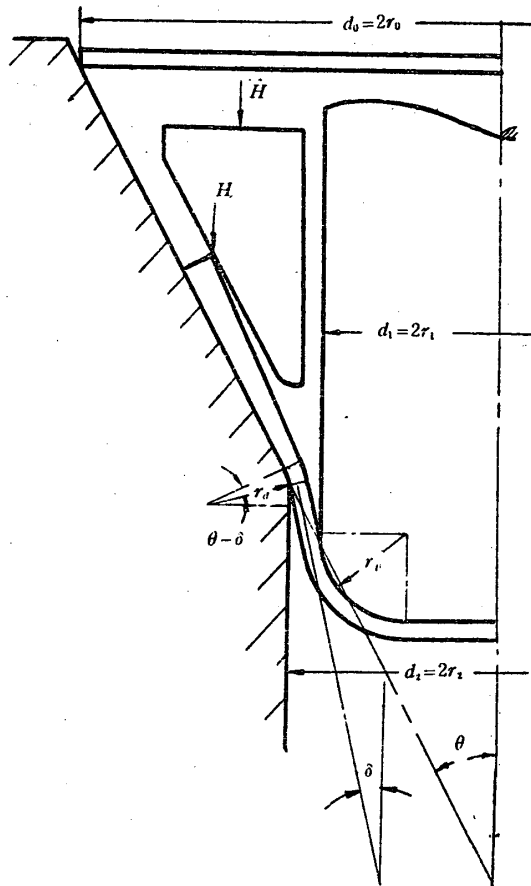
Manner of blank holding, and symbols for tool and blank dimensions.
